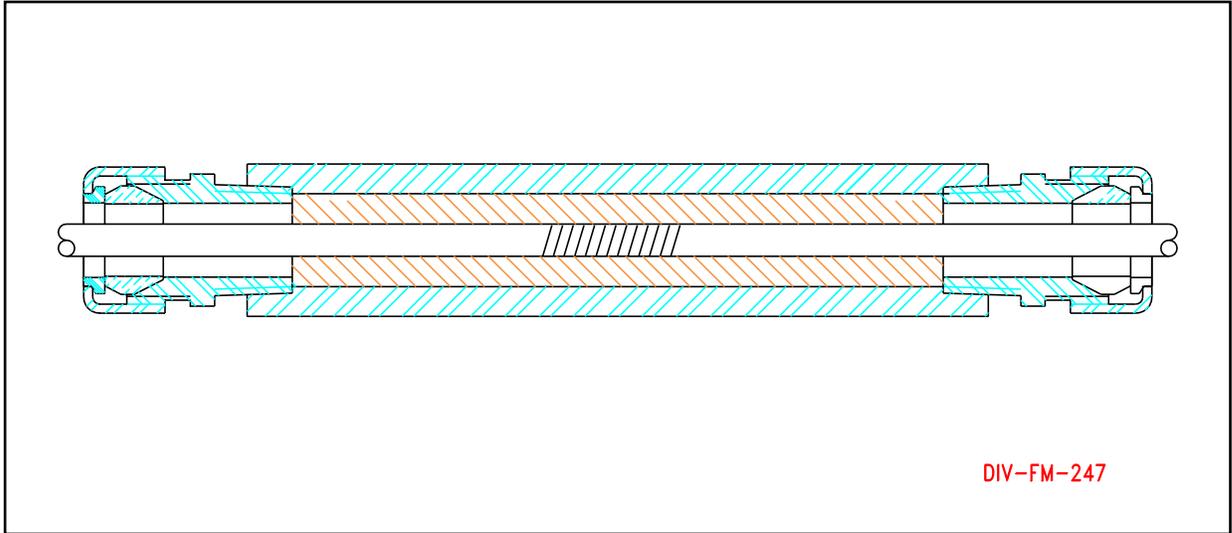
Cable splicing assembly with T&B (metal) connectors (FR-1135050900C)
